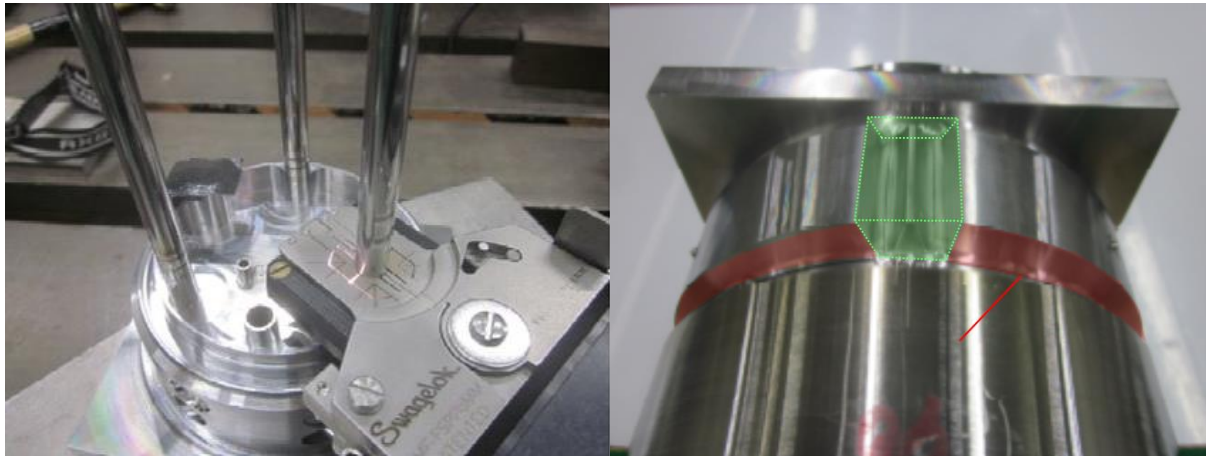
F82H TIG welding between U-shaped pipe and coolant manifold (L), and weld joints at the manifold (R).
